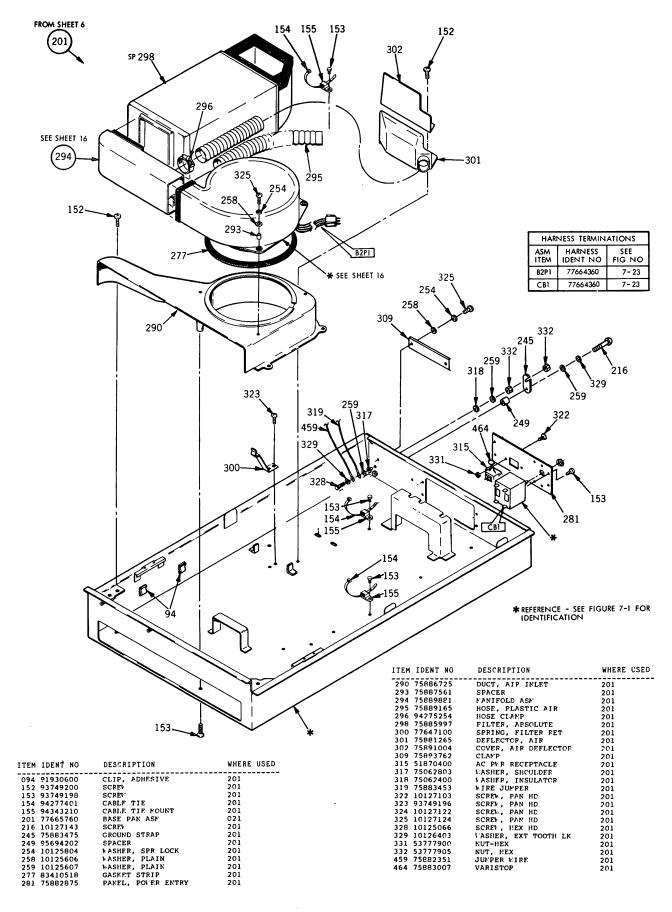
BASE PAN ASSEMBLY (SHEET 1 of 2)
